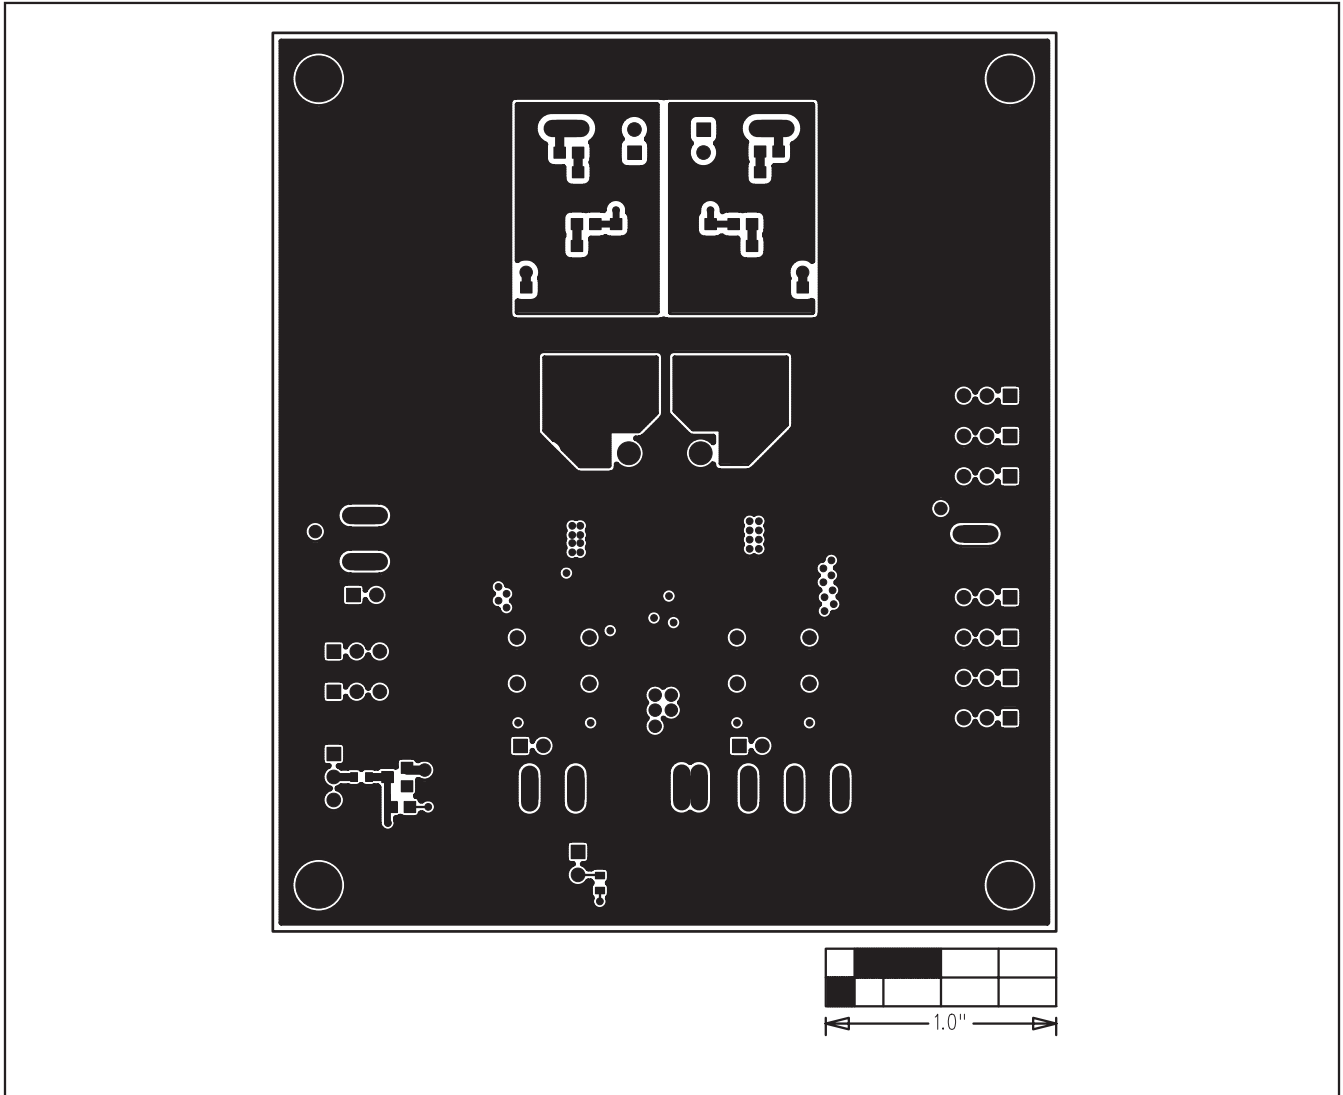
MAX9709 EV Kit PCB Layout—Solder Side
